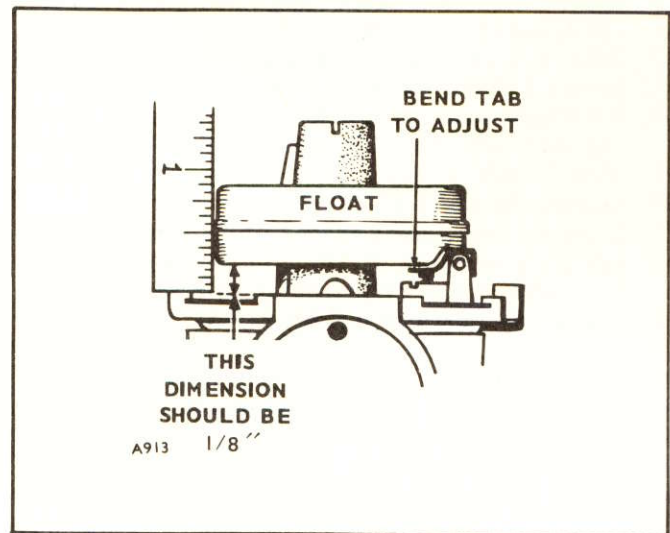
ZENITH CARBURETOR FLOAT ADJUSTMENT
